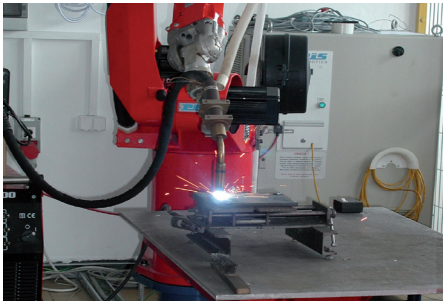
A view of robotized GMA metal cored wire arc surfacing stand equipped with TotalArc² 5000 CASTOLIN synergetic programmable power source and SRV6 REIS ROBOTICS welding robot
